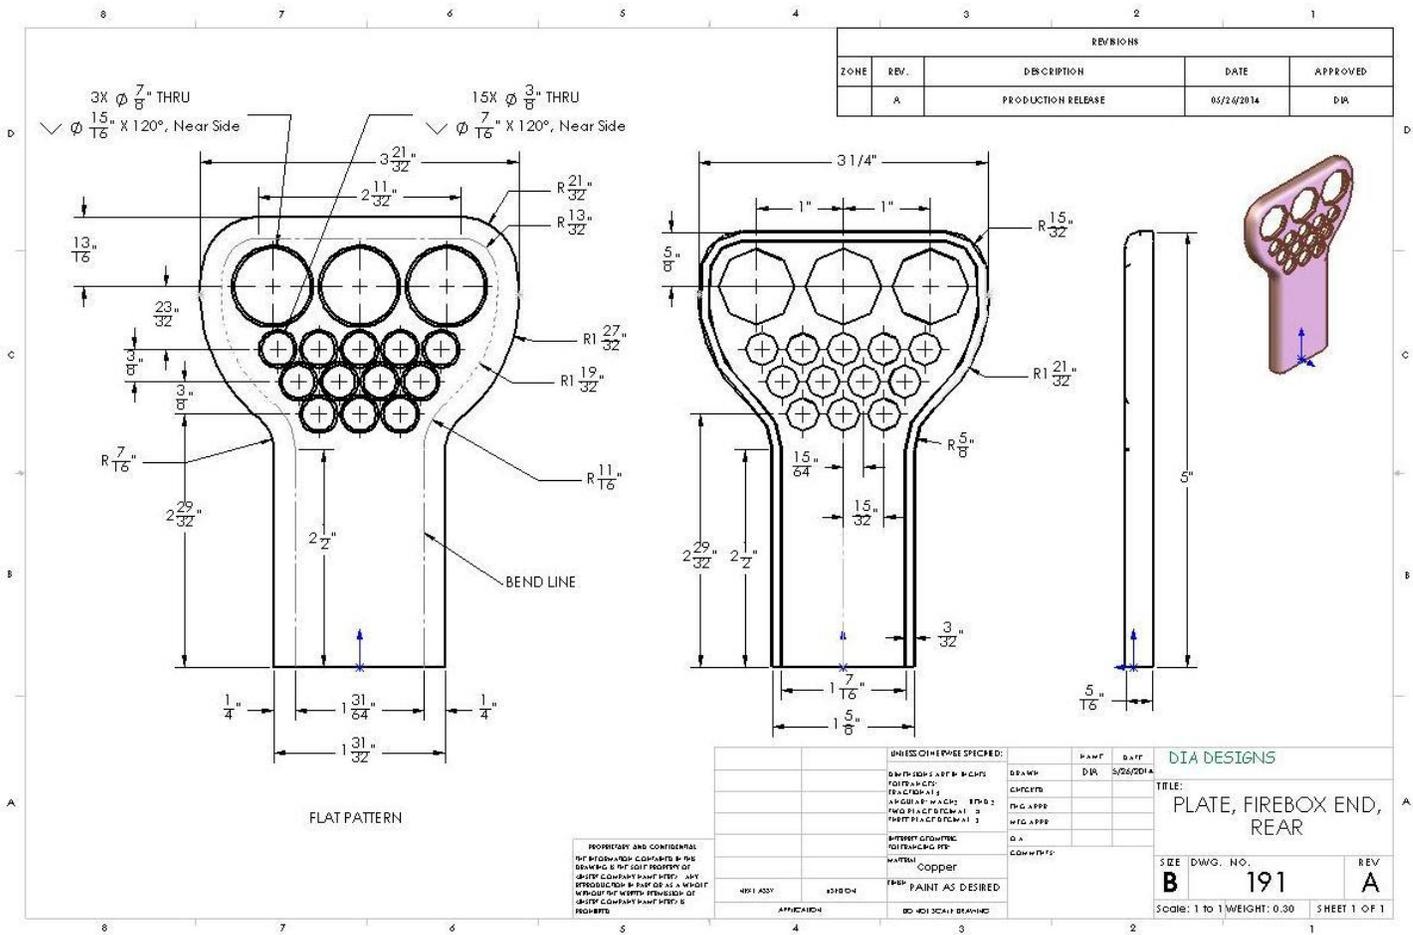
; Revised Firebox. Left side, Flat Pattern drawing. Right side, finished dimension drawing.
